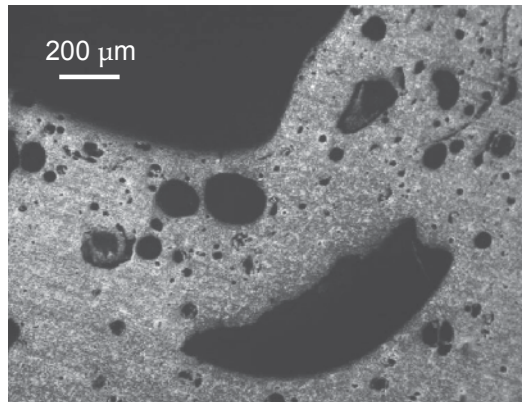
Gas porosity in a weld of magnesium alloy Mg-8%Al.
